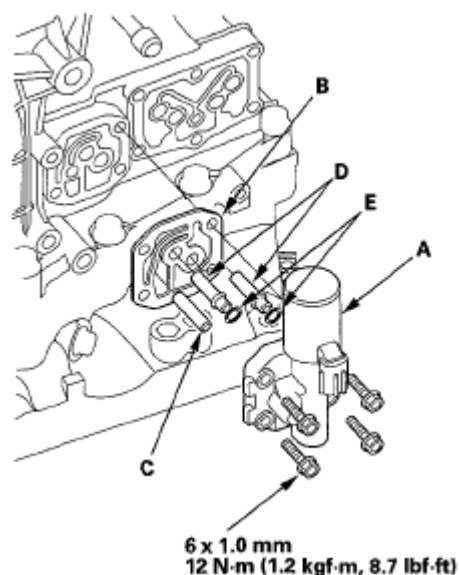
Identifying ATF Pipe, ATF Joint Pipes, Gasket, O-Ring & Bolts w/Torque Specification
